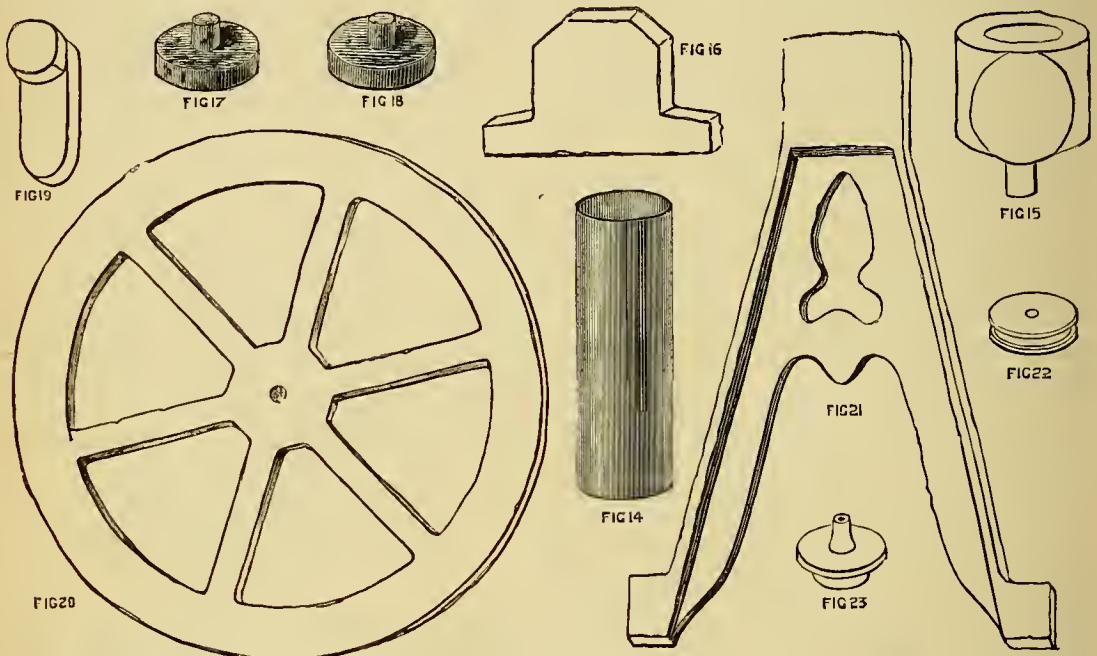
PIECE OF TUBE FOR CYLINDER. FIG. 15.—BOTTOM OF CYLINDER. FIG. 16.—STEAM BLOCK. FIGS. 17 AND 22.—PISTON. FIGS. 18 AND 23.—TOP OF CYLINDER. FIG. 19.—CRANK. FIG. 20.—FLYWHEEL. FIG. 21.—STANDARD.
